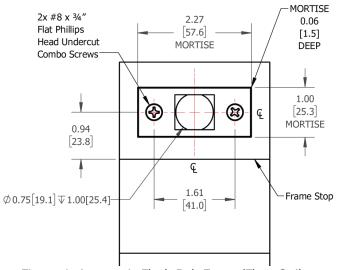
Automatic Flush Bolt Frame/Floor Strike
